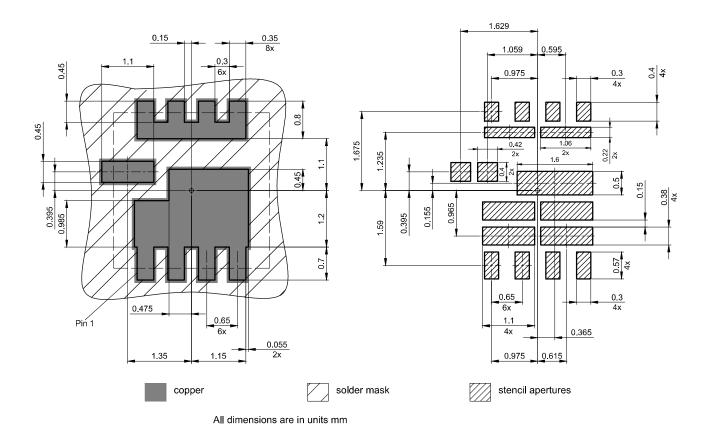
Outline Boardpad (PG-TTFN-9-1), dimensions in mm
